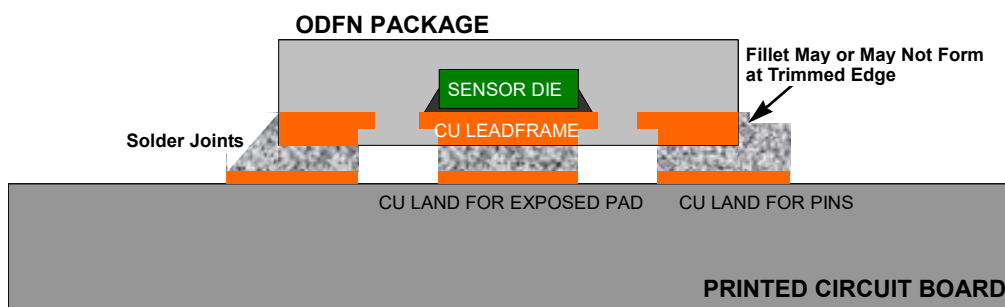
Schematic Showing ODFN Package Mounted on PCB
